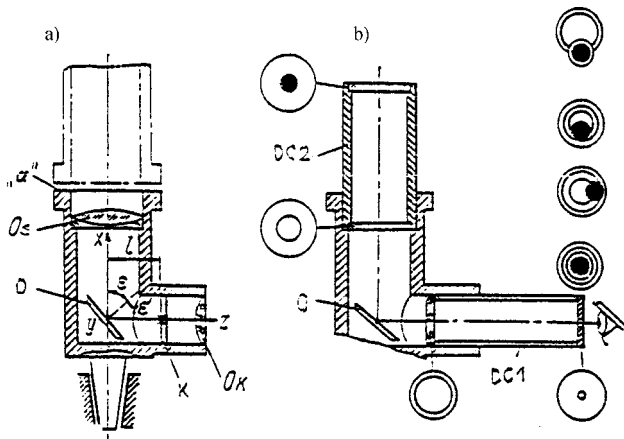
Control of plane mirror mounting using dioptric tubes for centring
